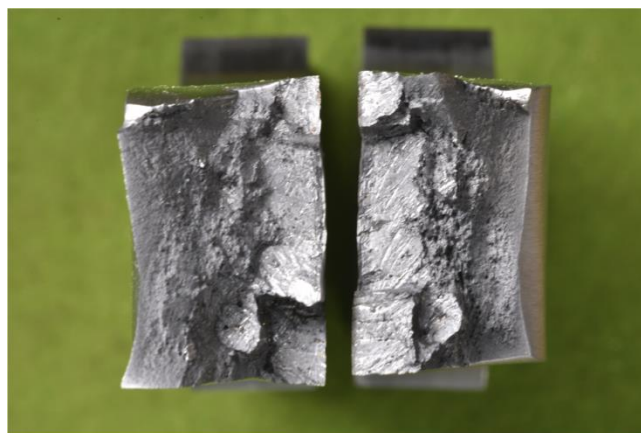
Fracture surface of tensile test specimen (Sample 1).
